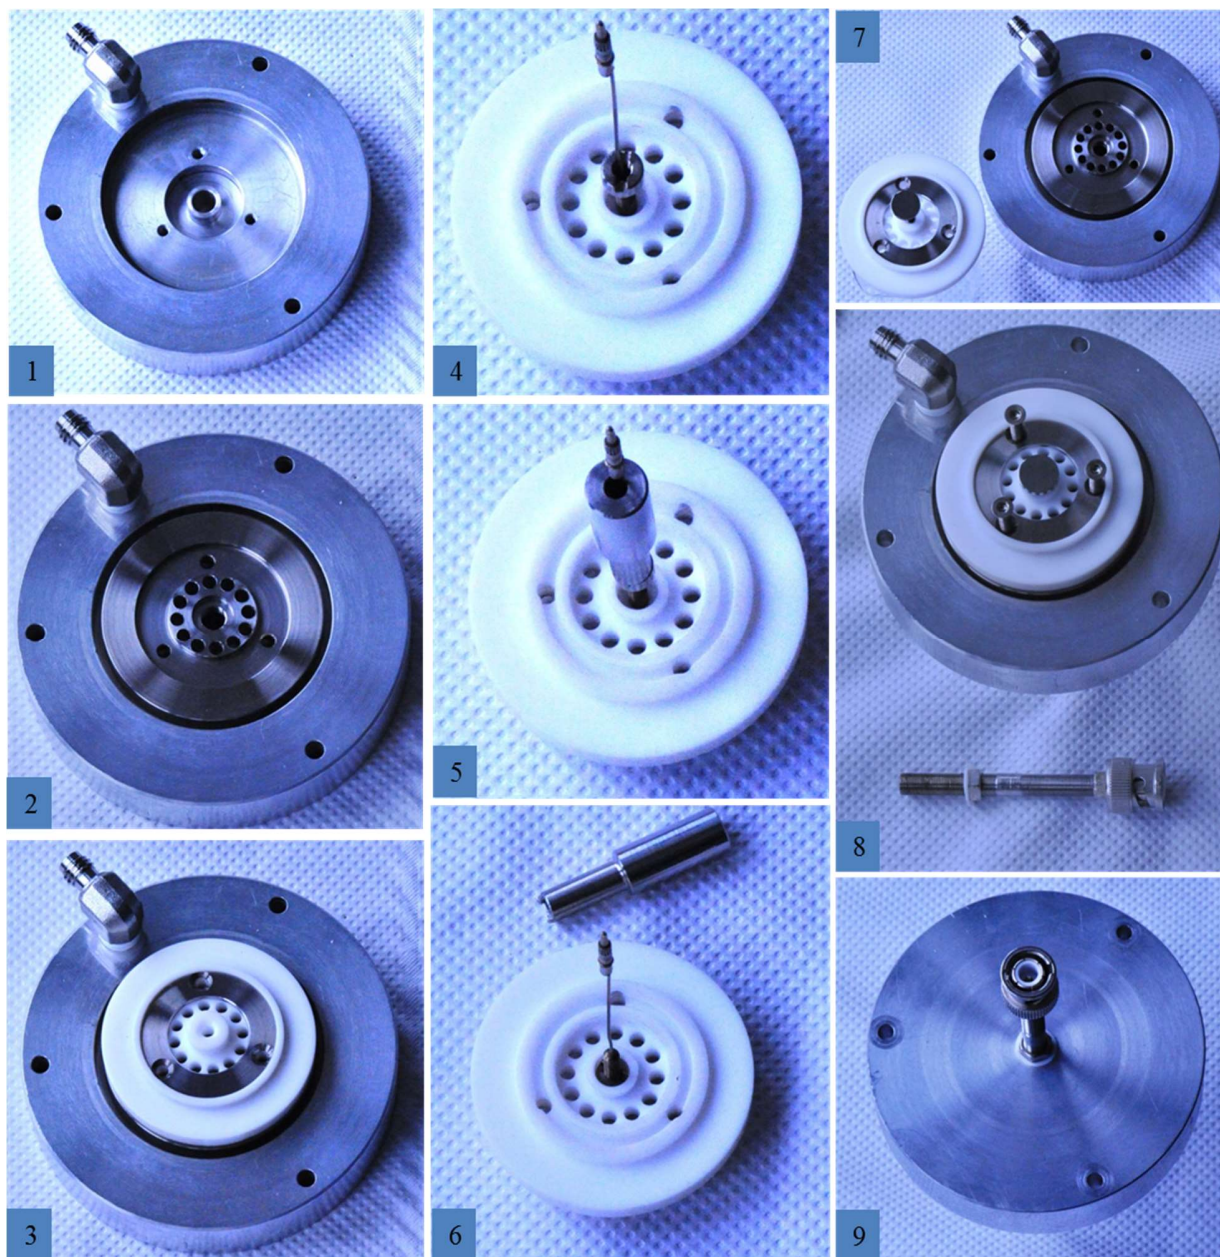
Stepwise detector assembly for closed drift tube arrangements. (1) basic flange with drift gas connector. (2) supporting electrode with diffusive drift gas outlet via 12 holes. (3) Last ring electrode mounted on isolation flange. (4) Detector plate mounted on isolation flange with special tool (5)+(6). (7)+(8) Plate detector with isolation flange assembly mounted on basic-flange. (9) Assembly of the plate detector terminal shielding.
